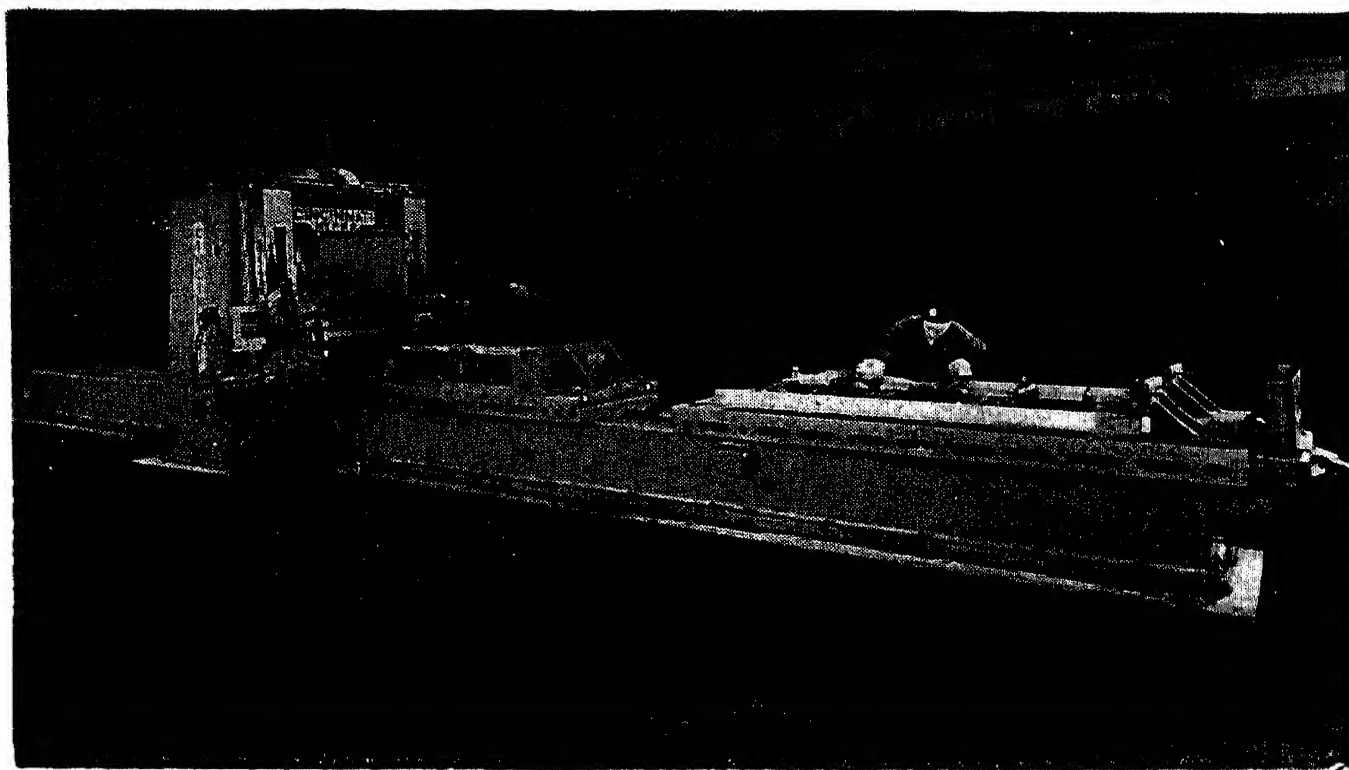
A planer with a divided or latching table. One section is carrying work being planed, the other is being set up. (Courtesy The Cincinnati Planer Co. Div., Giddings and Lewis Machine Tool Co.)
